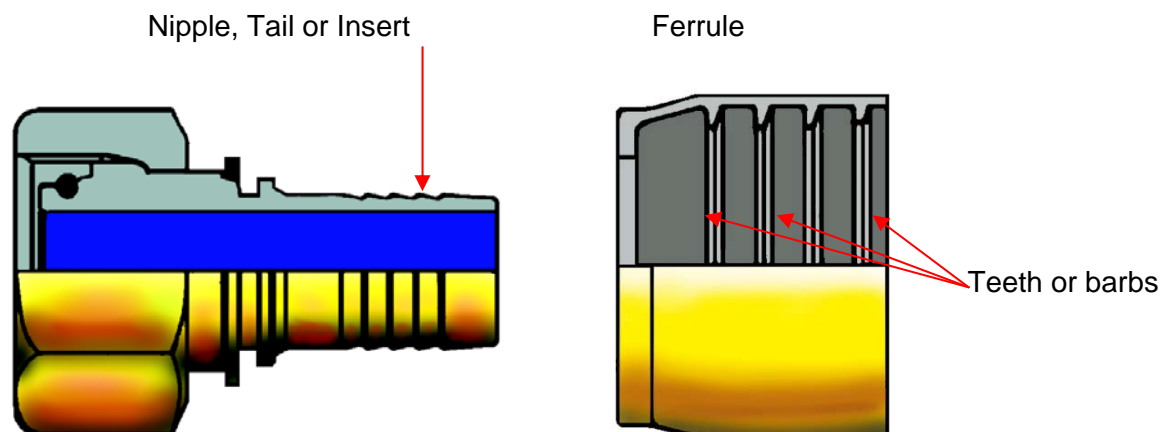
The two parts of a crimp (permanent) hose fitting. These may be pre-assembled before assembly onto a hose giving a one piece fitting, or the two parts remain separate and are connected together during the crimping operation. This method allows greater flexibility for matching variations but requires greater skill to achieve a correct assembly
